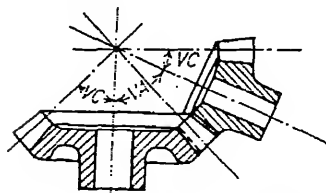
Bevel gears with shafts at less than 90 deg.
